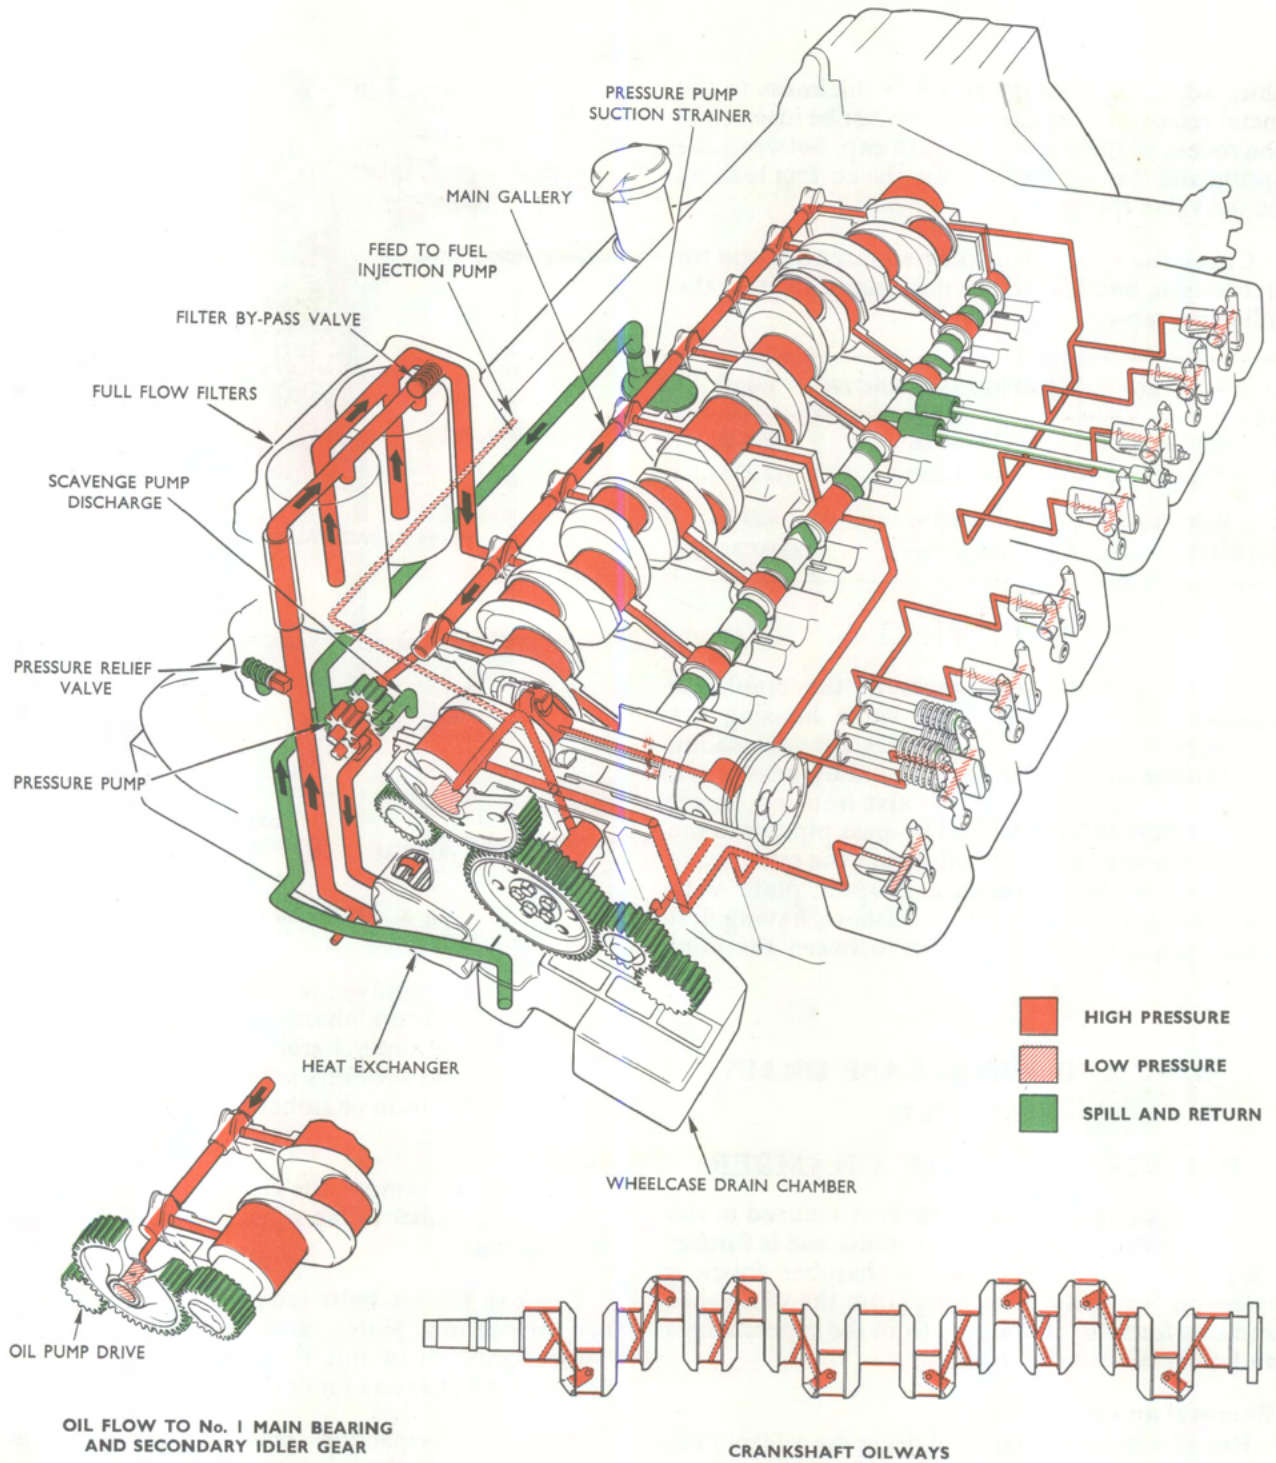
Lubrication system — 8-cylinder 4-valve head engine
